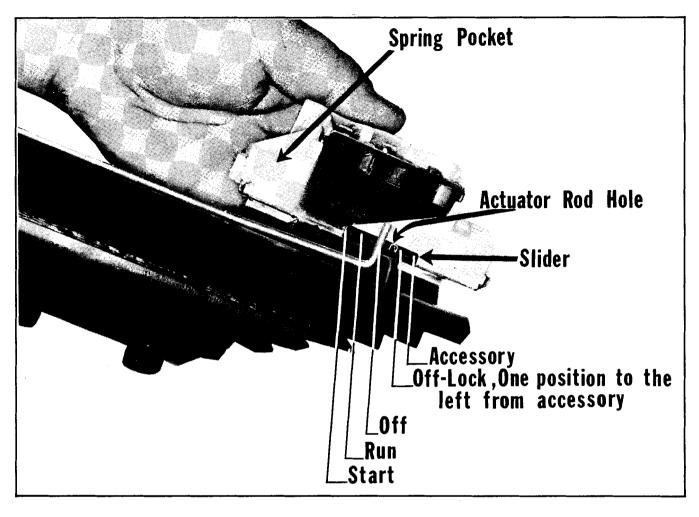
Installing Ignition Switch (Tilt Column)
